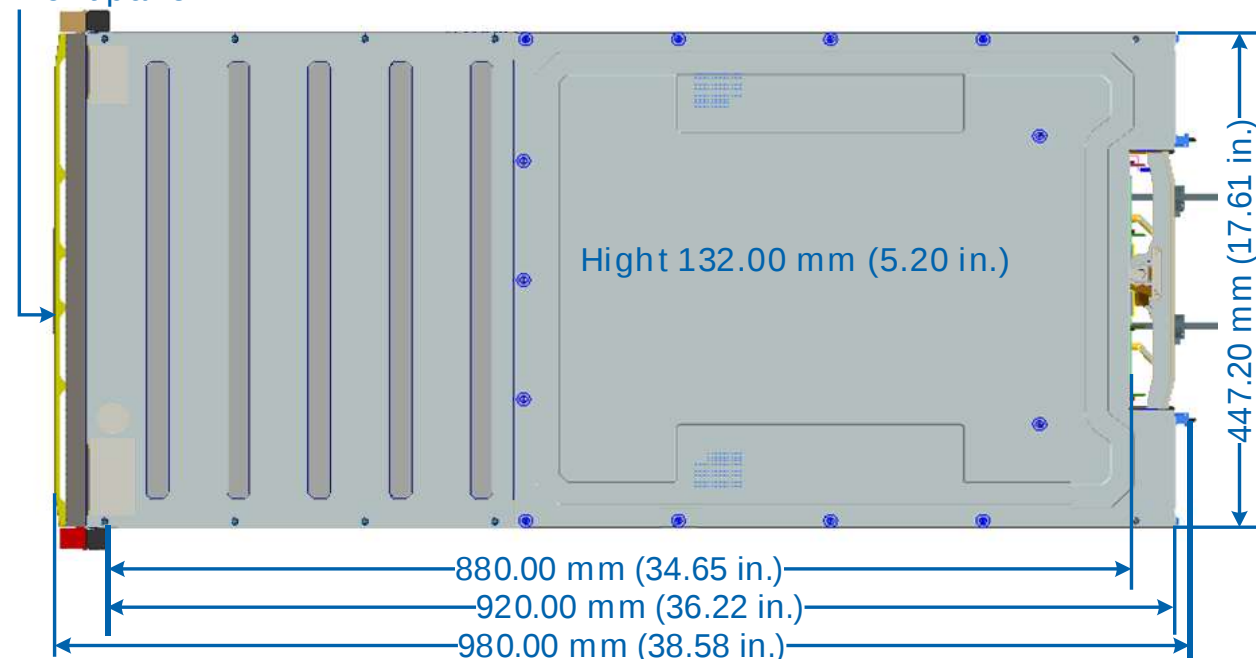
Dimensions of 3U JBOD (vertical view)
